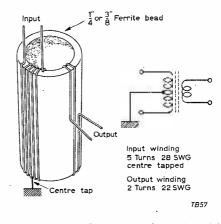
Details of simple transformer to match balanced 400 Ω feeder to 75 Ω coaxial feeder.
